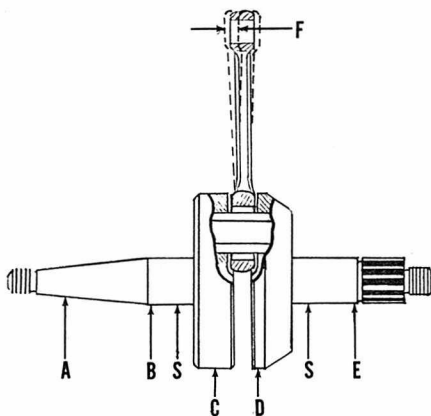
When measuring crankshaft eccentricity, assembly should be supported in V blocks at points (S). Refer to text for limits.
